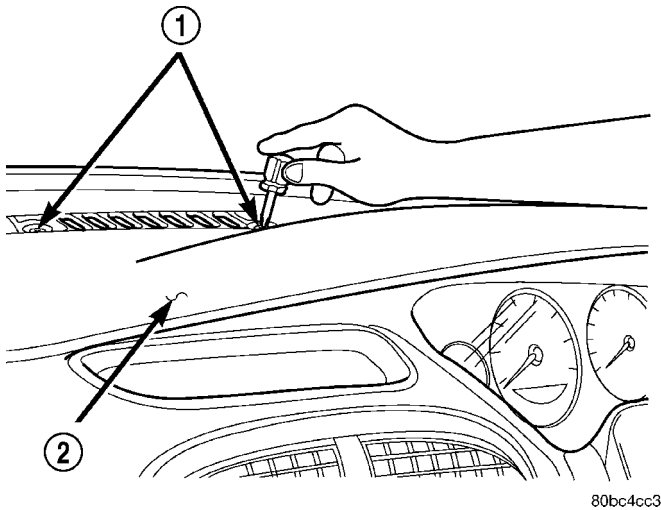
INSTRUMENT PANEL TOP COVER CENTER RETAINING SCREWS
